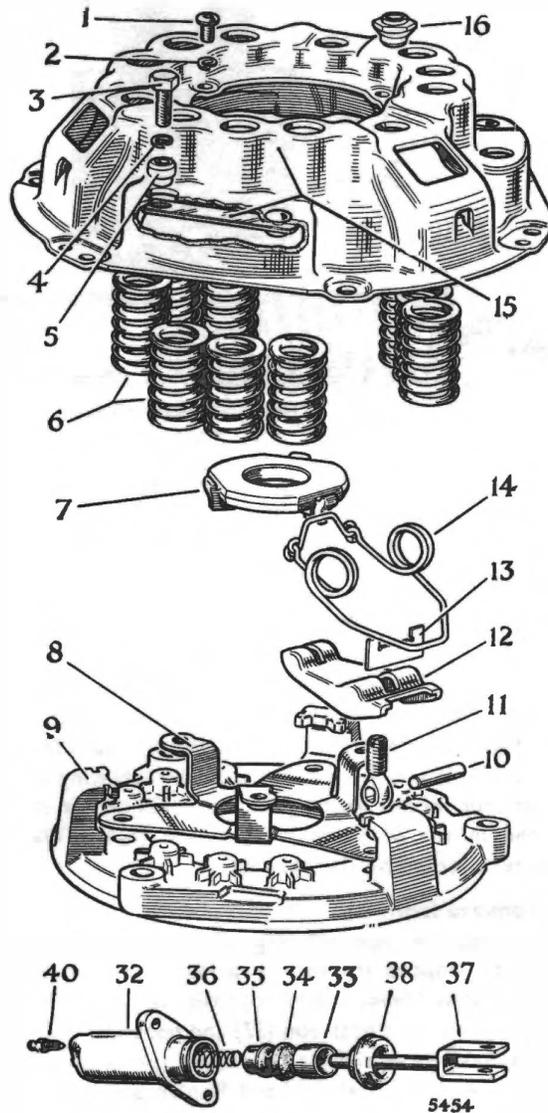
Exploded view of clutch and slave cylinder (Alpine Series II, III and Rapier Series IIIA cars).
